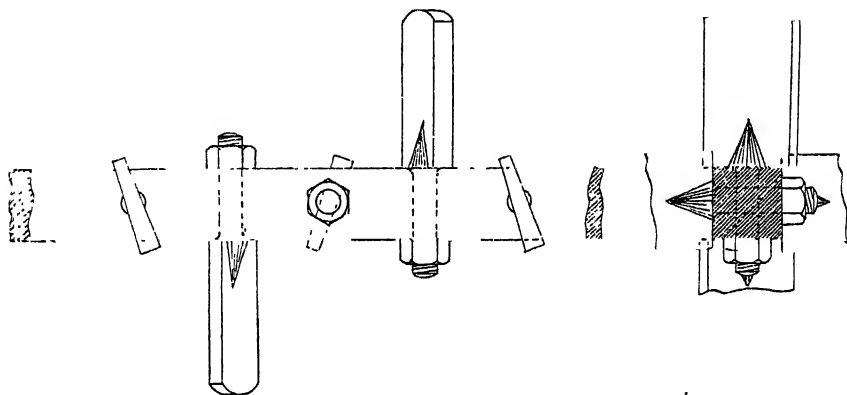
Paddle-blade Conveyor (Wedge Cutters).
